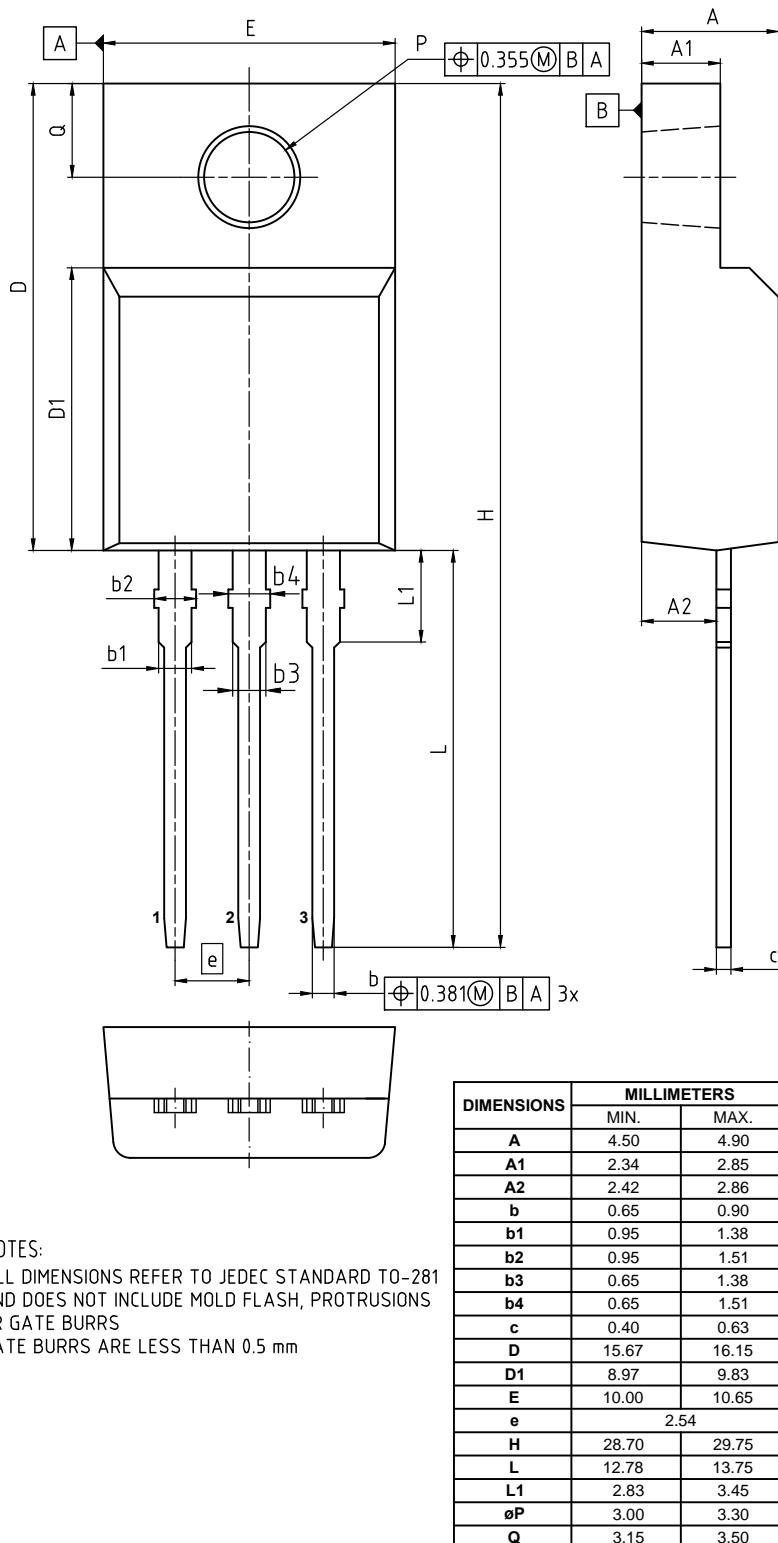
Outline PG-T0 220 FullPAK, dimensions in mm/inches
